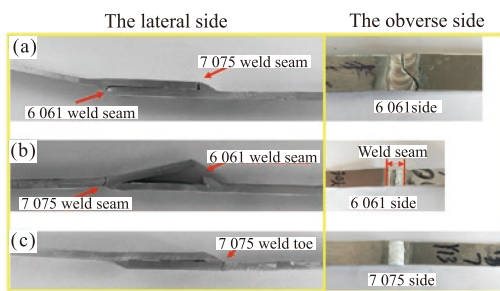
Fracture position of the specimens: (a) specimen W07; (b) specimen Y06; (c) specimen Y13
